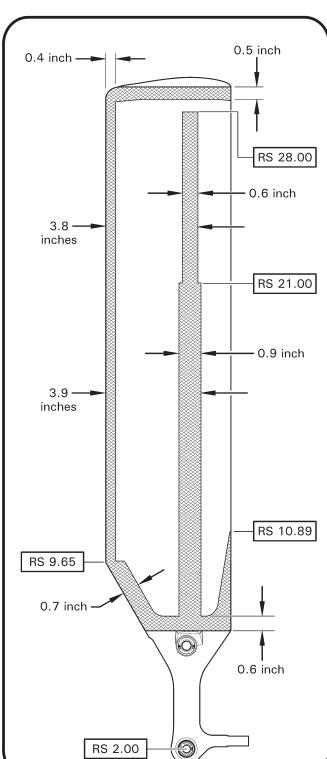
TAIL ROTOR BLADE PAINT SCHEME
